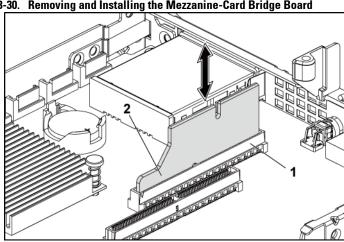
Removing and Installing the Mezzanine-Card Bridge Board
